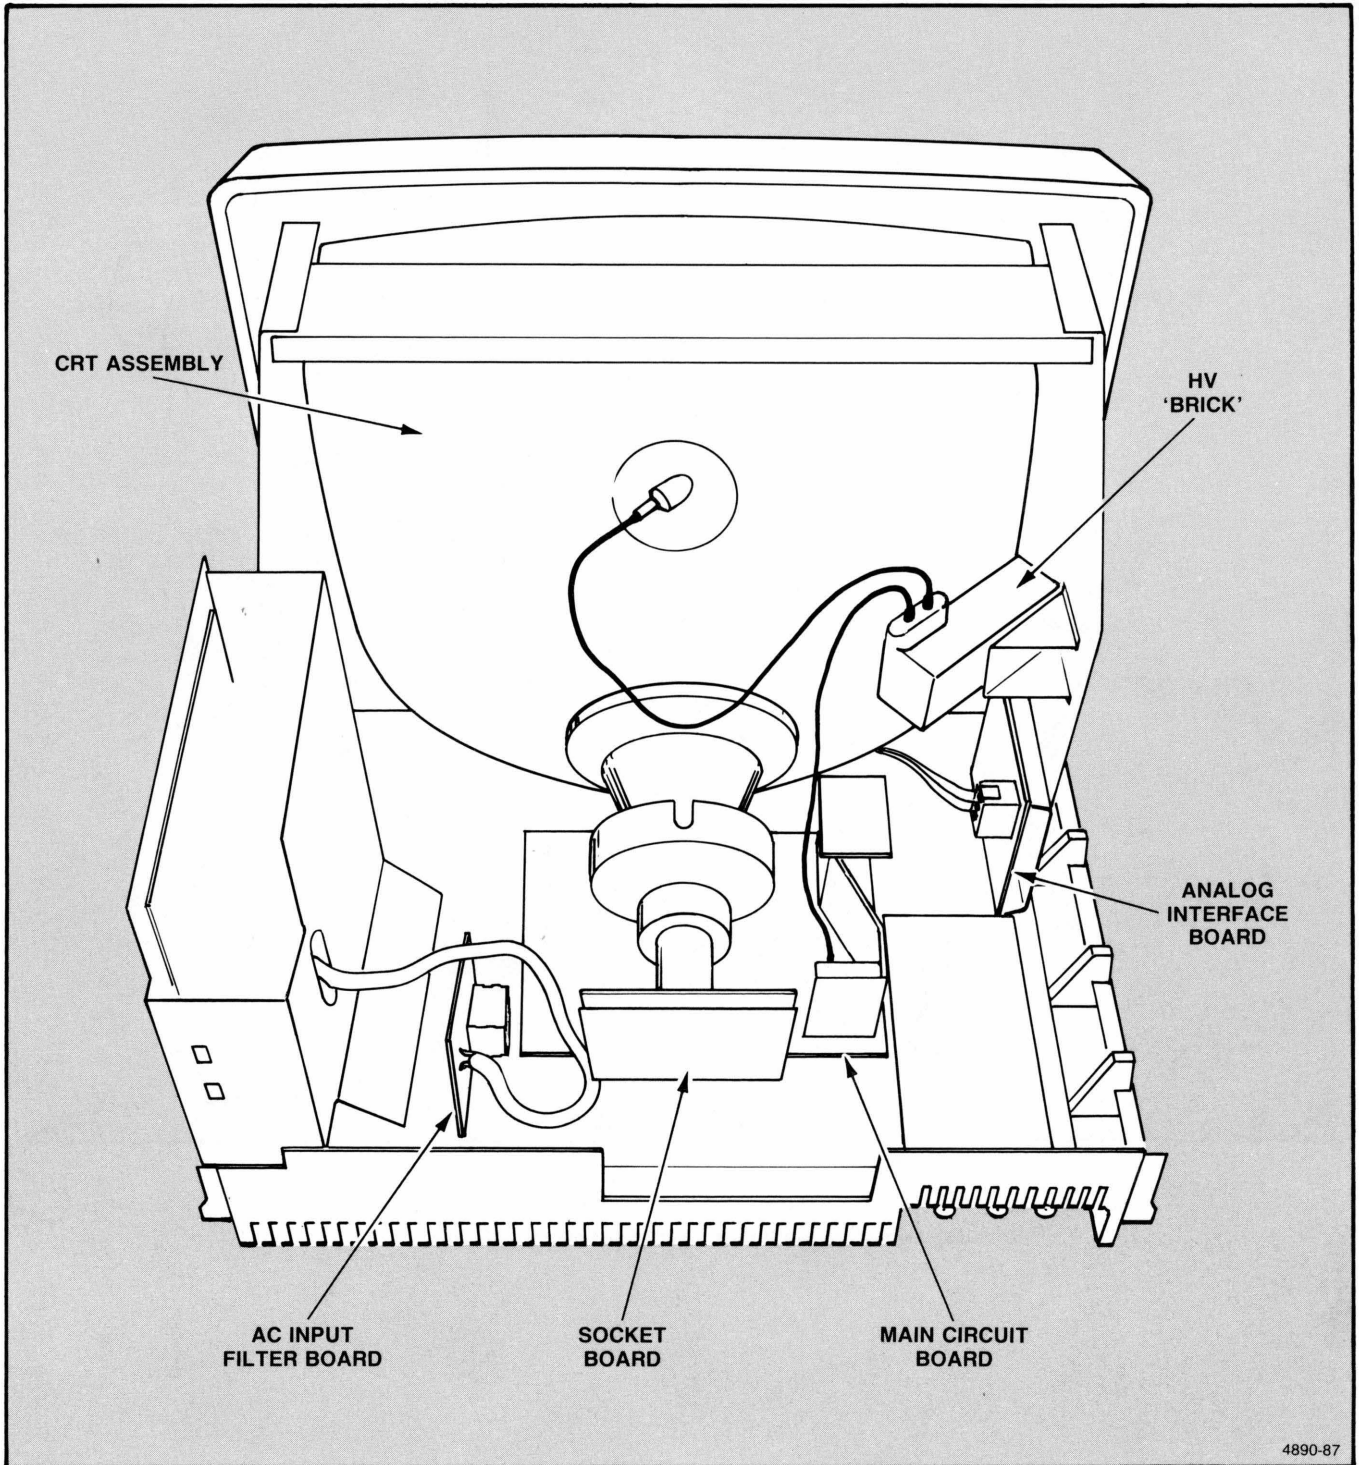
A. Circuit Boards and Assemblies in 119-2023-00 Display Module.
